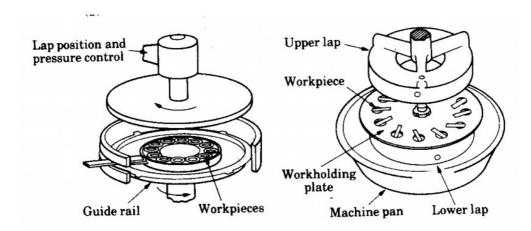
Production lapping on (a) flat surface (b) cylindrical surface
